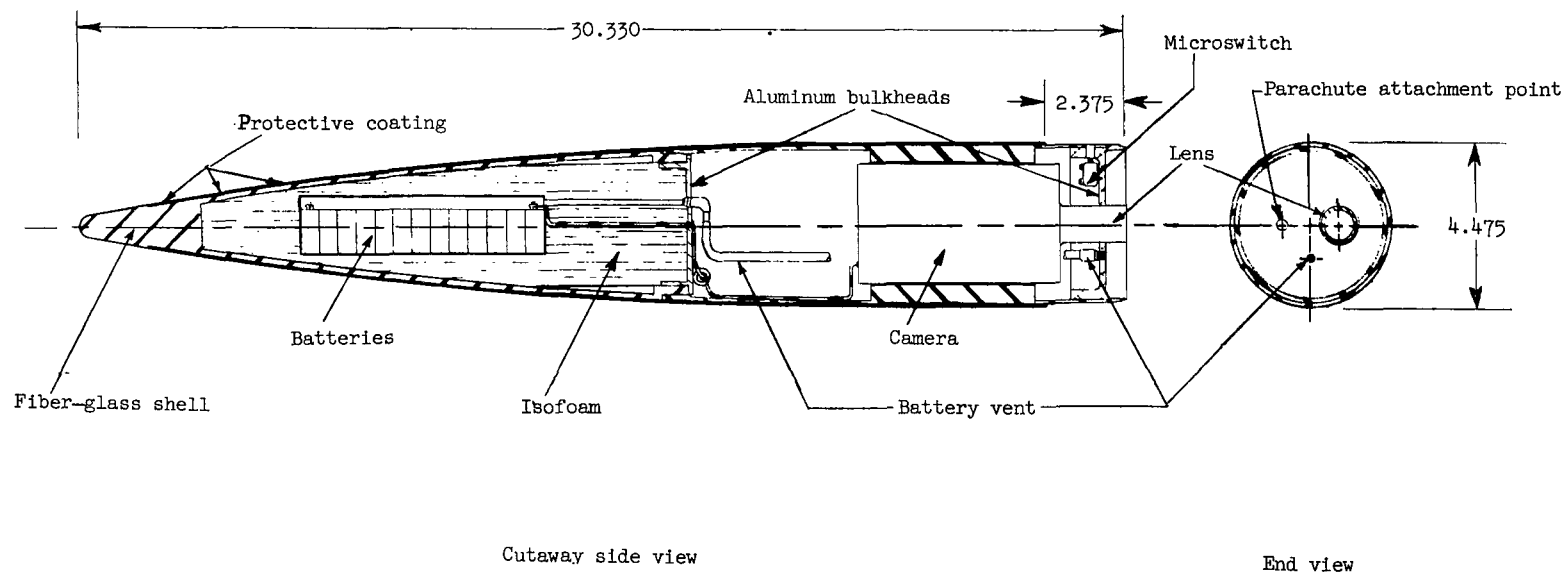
Assembly drawing of camera package. Dimensions are in inches.
